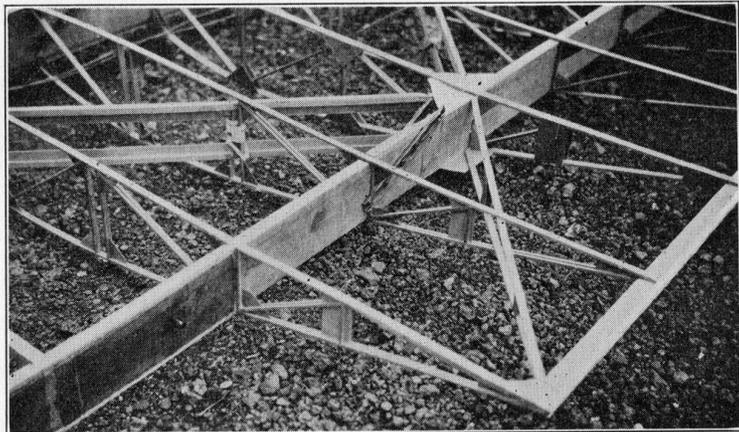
Plate XXI. Detail of Prüfling Wing Showing Aileron Hinge and Rear Strut Attachment
